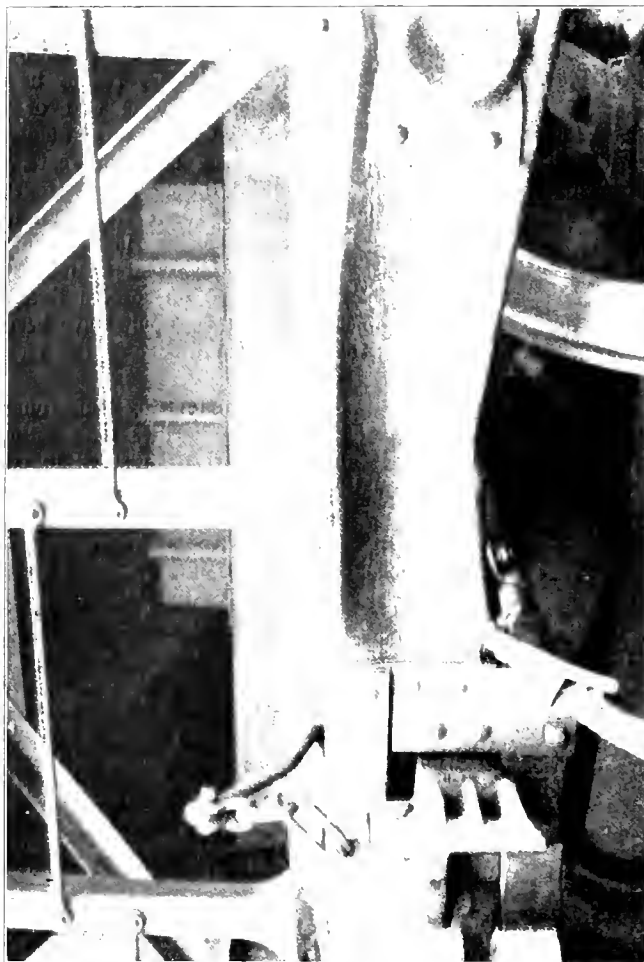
BADLY BENT END SILL ON HOPPER CAR.
